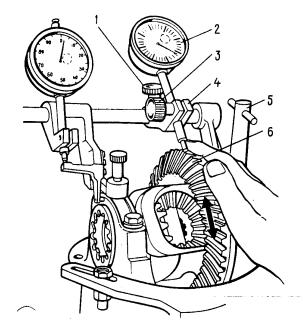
Checking Backlash of Final Drive Gears with Gauge A.95688/R:
